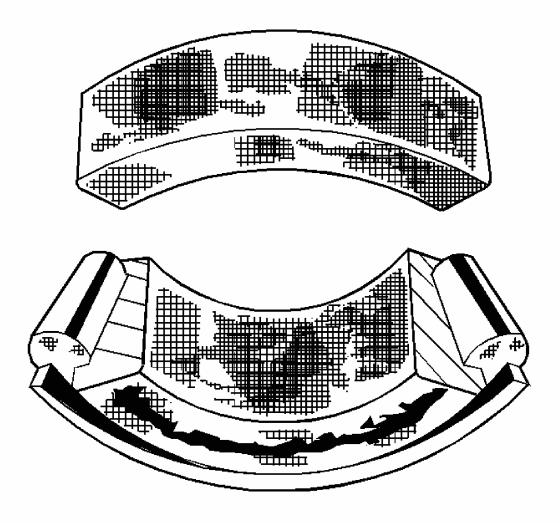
Identifying Frettage Courtesy of GENERAL MOTORS CORP.
